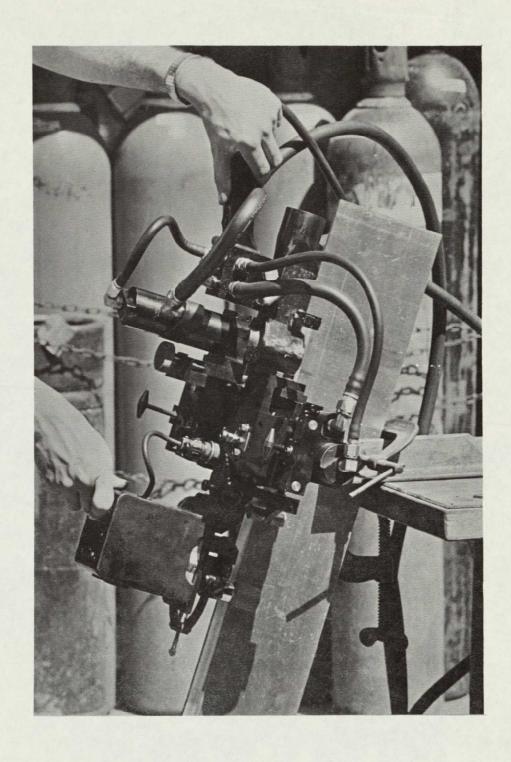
Method for Supporting Device in Preparing Surfaces in Vertical Welding Position.
